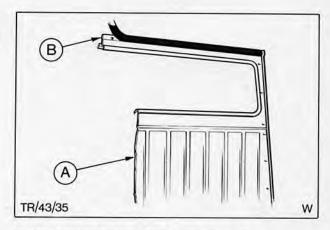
Sealing strip to partition panel upper edge A – Panel B – Upper edge
